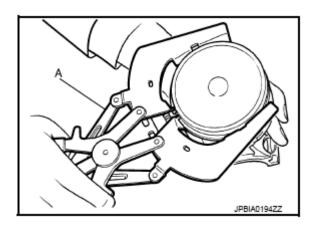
Removing Piston Rings From Piston Using Piston Ring Expander Courtesy of NISSAN NORTH AMERICA, INC.
